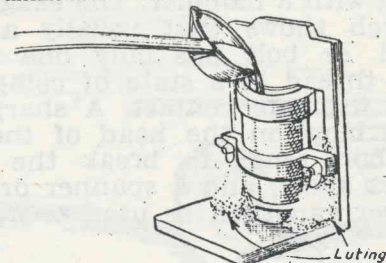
Pouring the bearing. Any leakage points are sealed with luting or clay and the metal is poured in a steady stream until the bearing is full.
